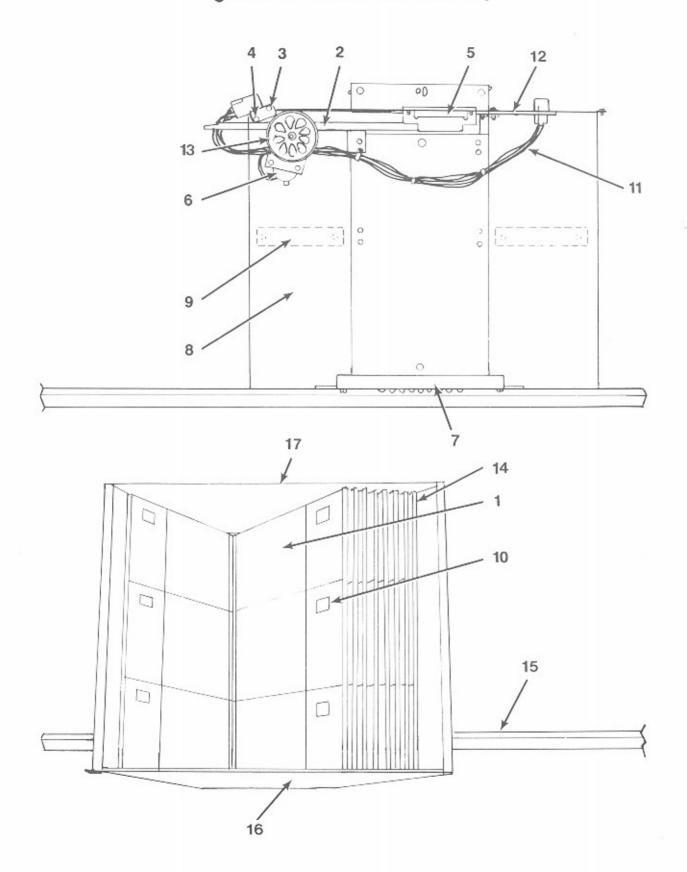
CD-51A Front Door Assembly (Sheet 2)
